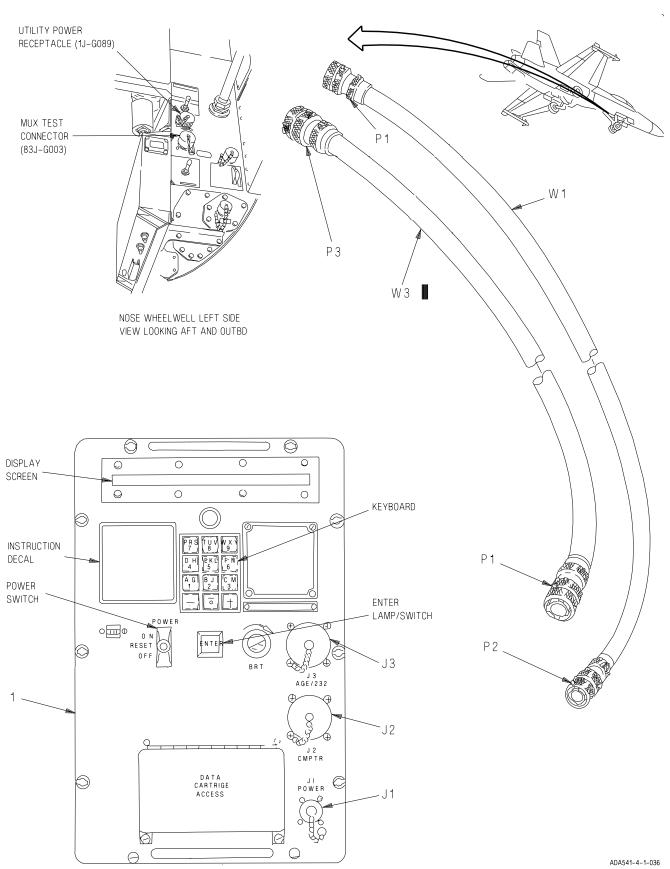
Test Equipment Hookup Locator (Sheet 1)
